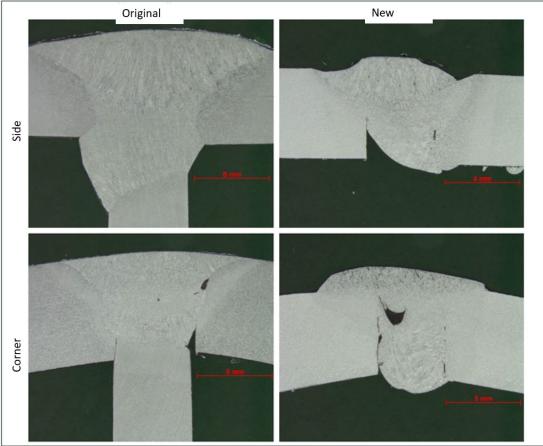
Cross-sections of the weld on an originally manufactured and a newly manufactured control arm. Image: Element Materials Technology AB.
